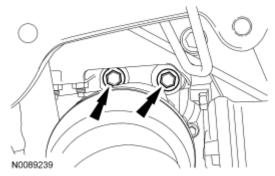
Locating Exhaust Flexible Pipe Clamp & Exhaust Hangers Courtesy of FORD MOTOR CO.
